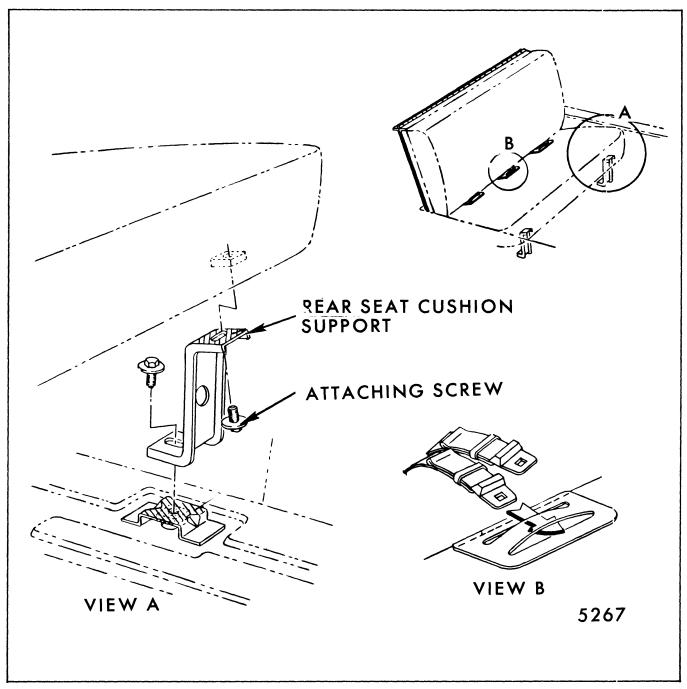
Folding Third Seat Cushion - "A" Body Three-Seat Styles
